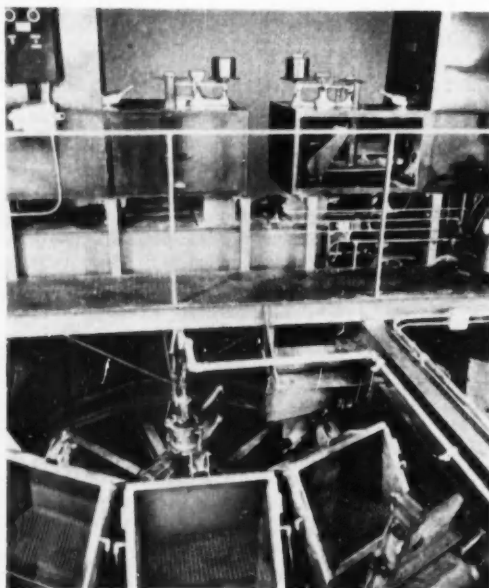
Automatic proportioning and blending equipment at top of the 12-station shell molding machine.
